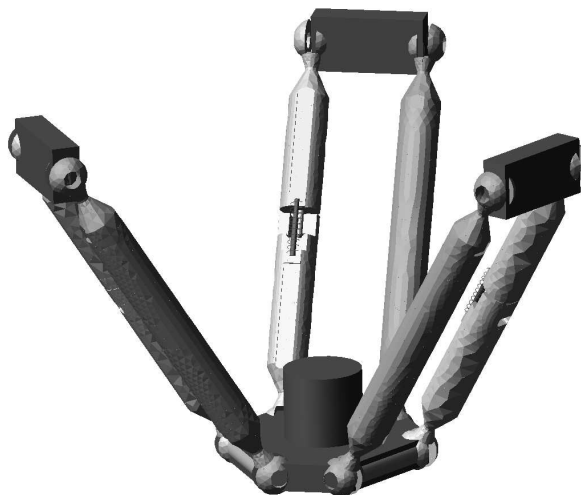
MSC.ADAMS model of exemplary machine tool with parallel kinematics, exchanged adaptronic struts at positions 2,3,5 (ad235) .
